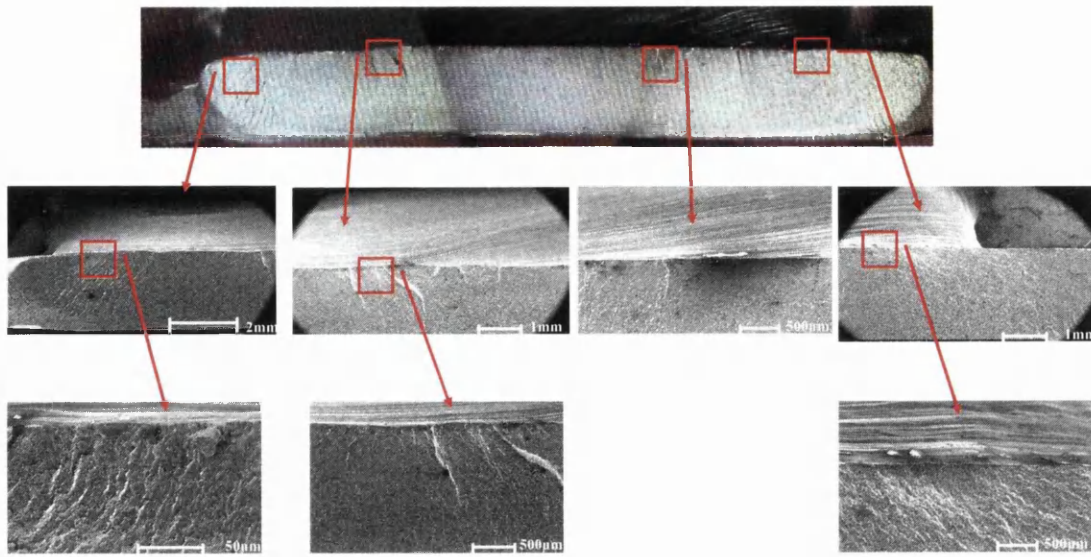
Typical Weld Toe Failure – GM11A
